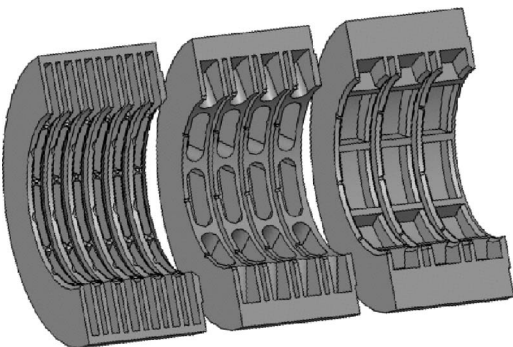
Half-section models of the diverging twelve-bladed (left), eight-bladed (center), and six-bladed (right) seals
